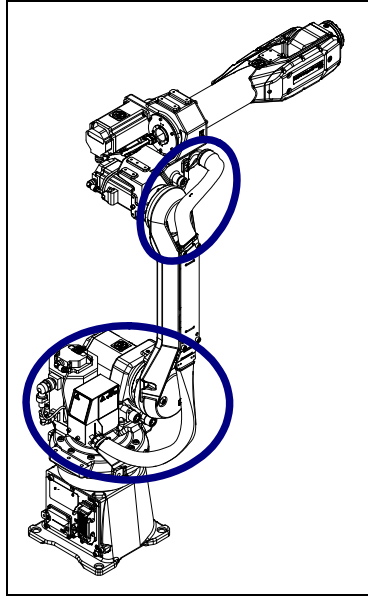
(a) Inspection points of the mechanical unit cables
